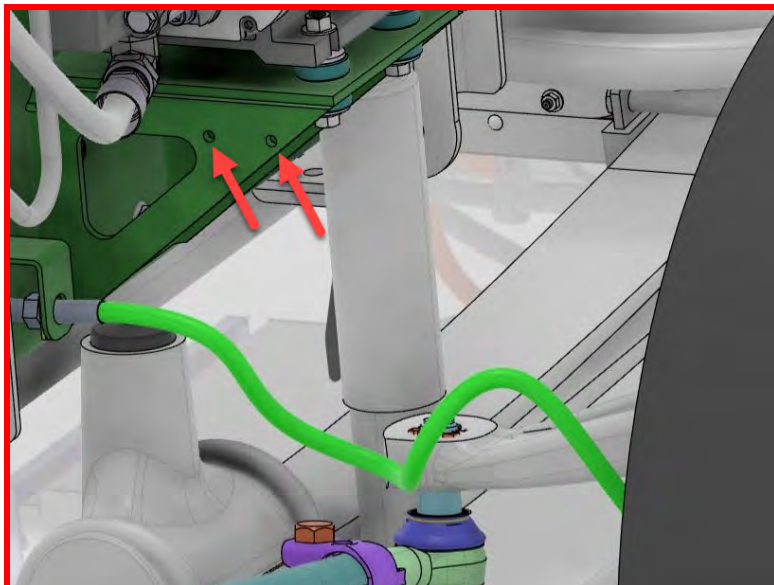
Mounting Holes for Drivers Side Brake Line Bracket
